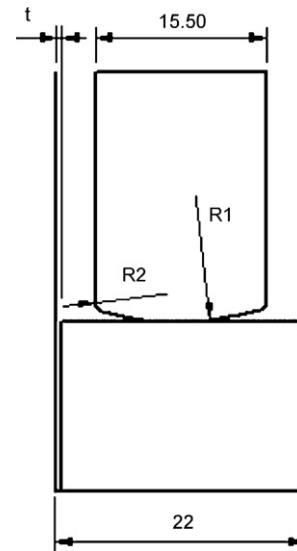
Die and workpiece geometries (dimensions are in mm).
